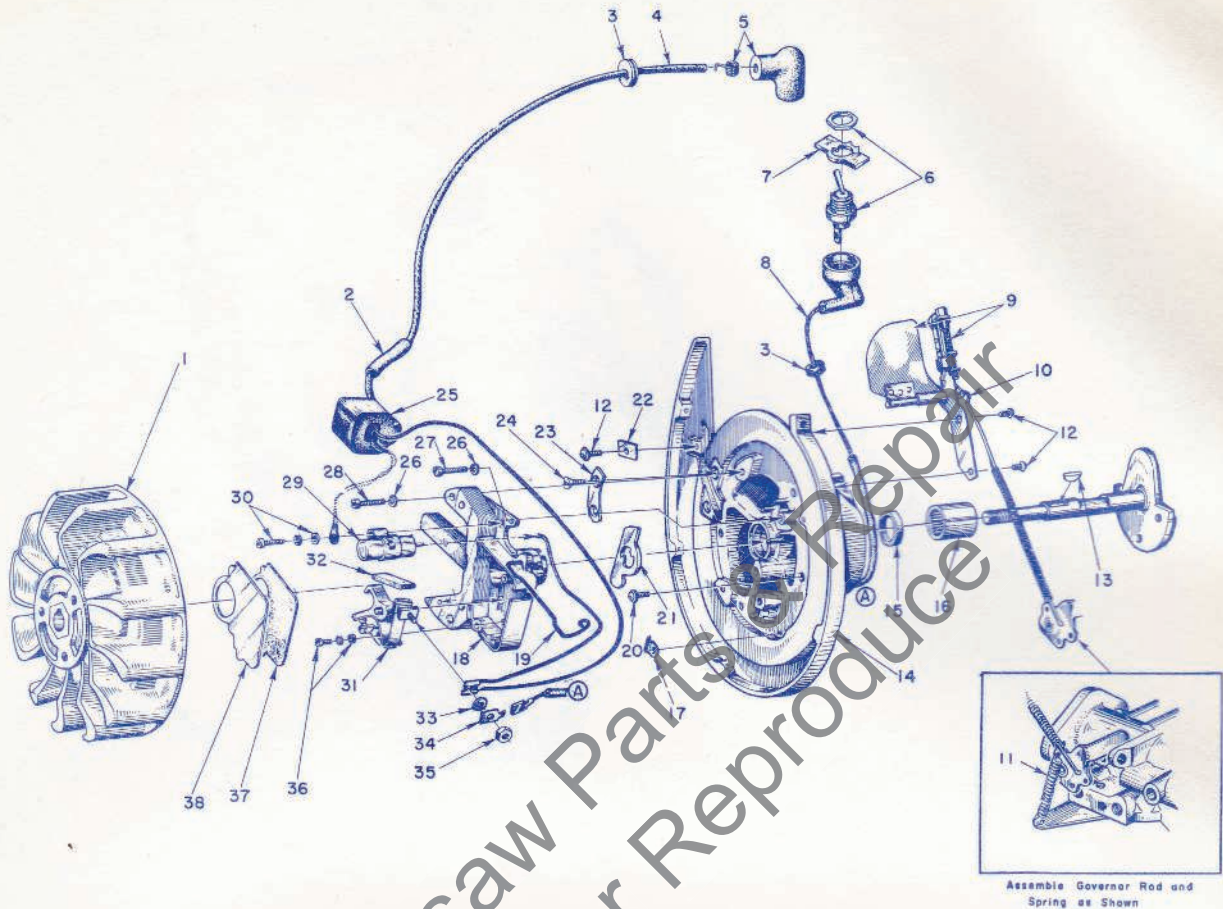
IGNITION AND GOVERNOR PARTS
